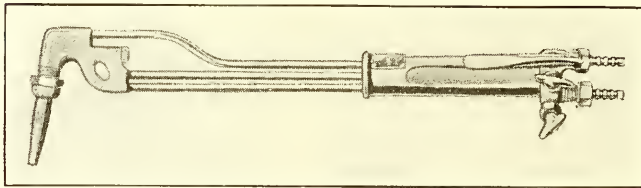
Carbo-Hydrogen Model C Cutting Torch
